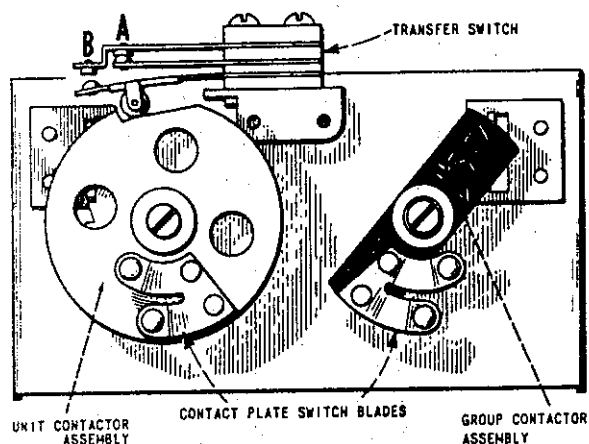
SIDE VIEW - TRANSFER SWITCH
